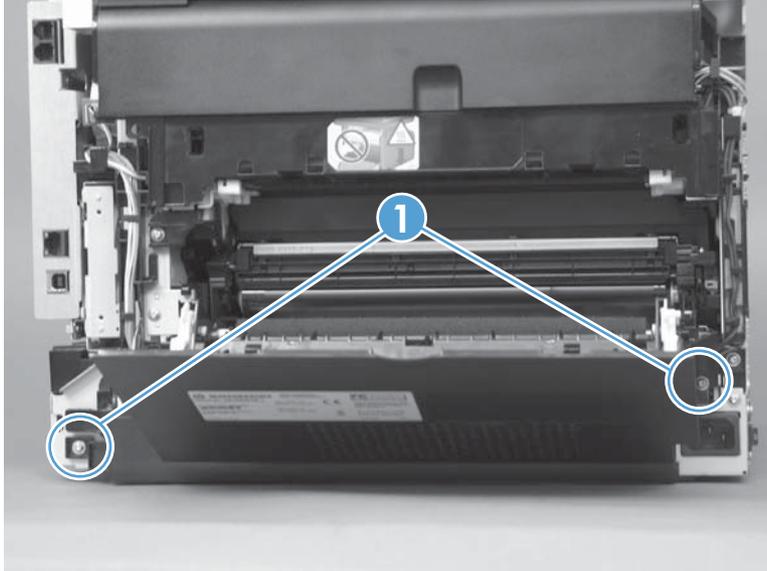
Remove the front door and front-lower cover (8 of 8)
